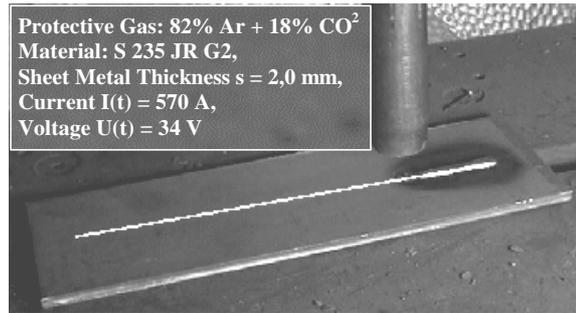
Possible insertions: welding seam and welding parameters.
